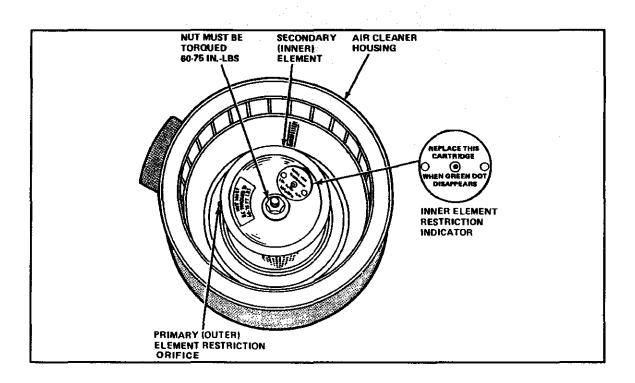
Dual Element Air Cleaner With Indicator in End Cap
